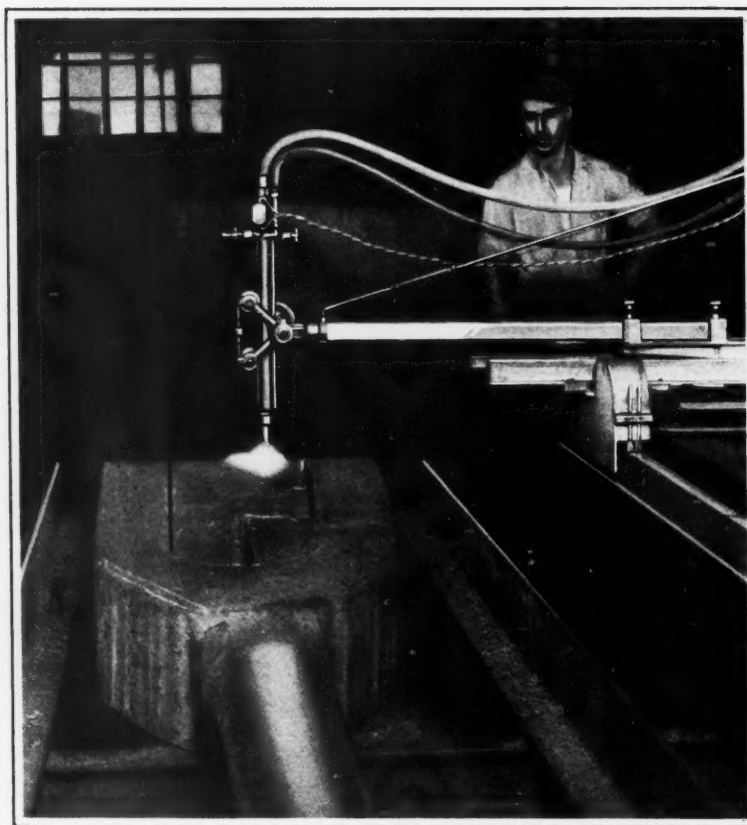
Cutting a Steel Forging, Sixteen Inches Thick, with an Automatically Guided Oxy-acetylene Torch
